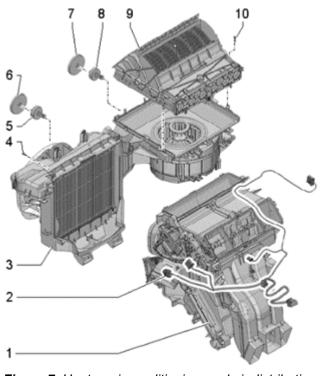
Heater, air conditioning, and air distribution housing assembly.
